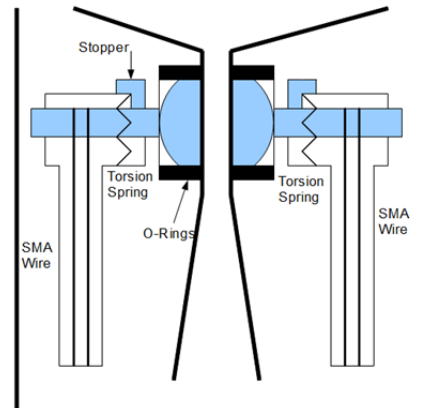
Ball valve diagram. SMA wires contract to rotate valve closed. Wires expand and torsion spring rotates valve open.
